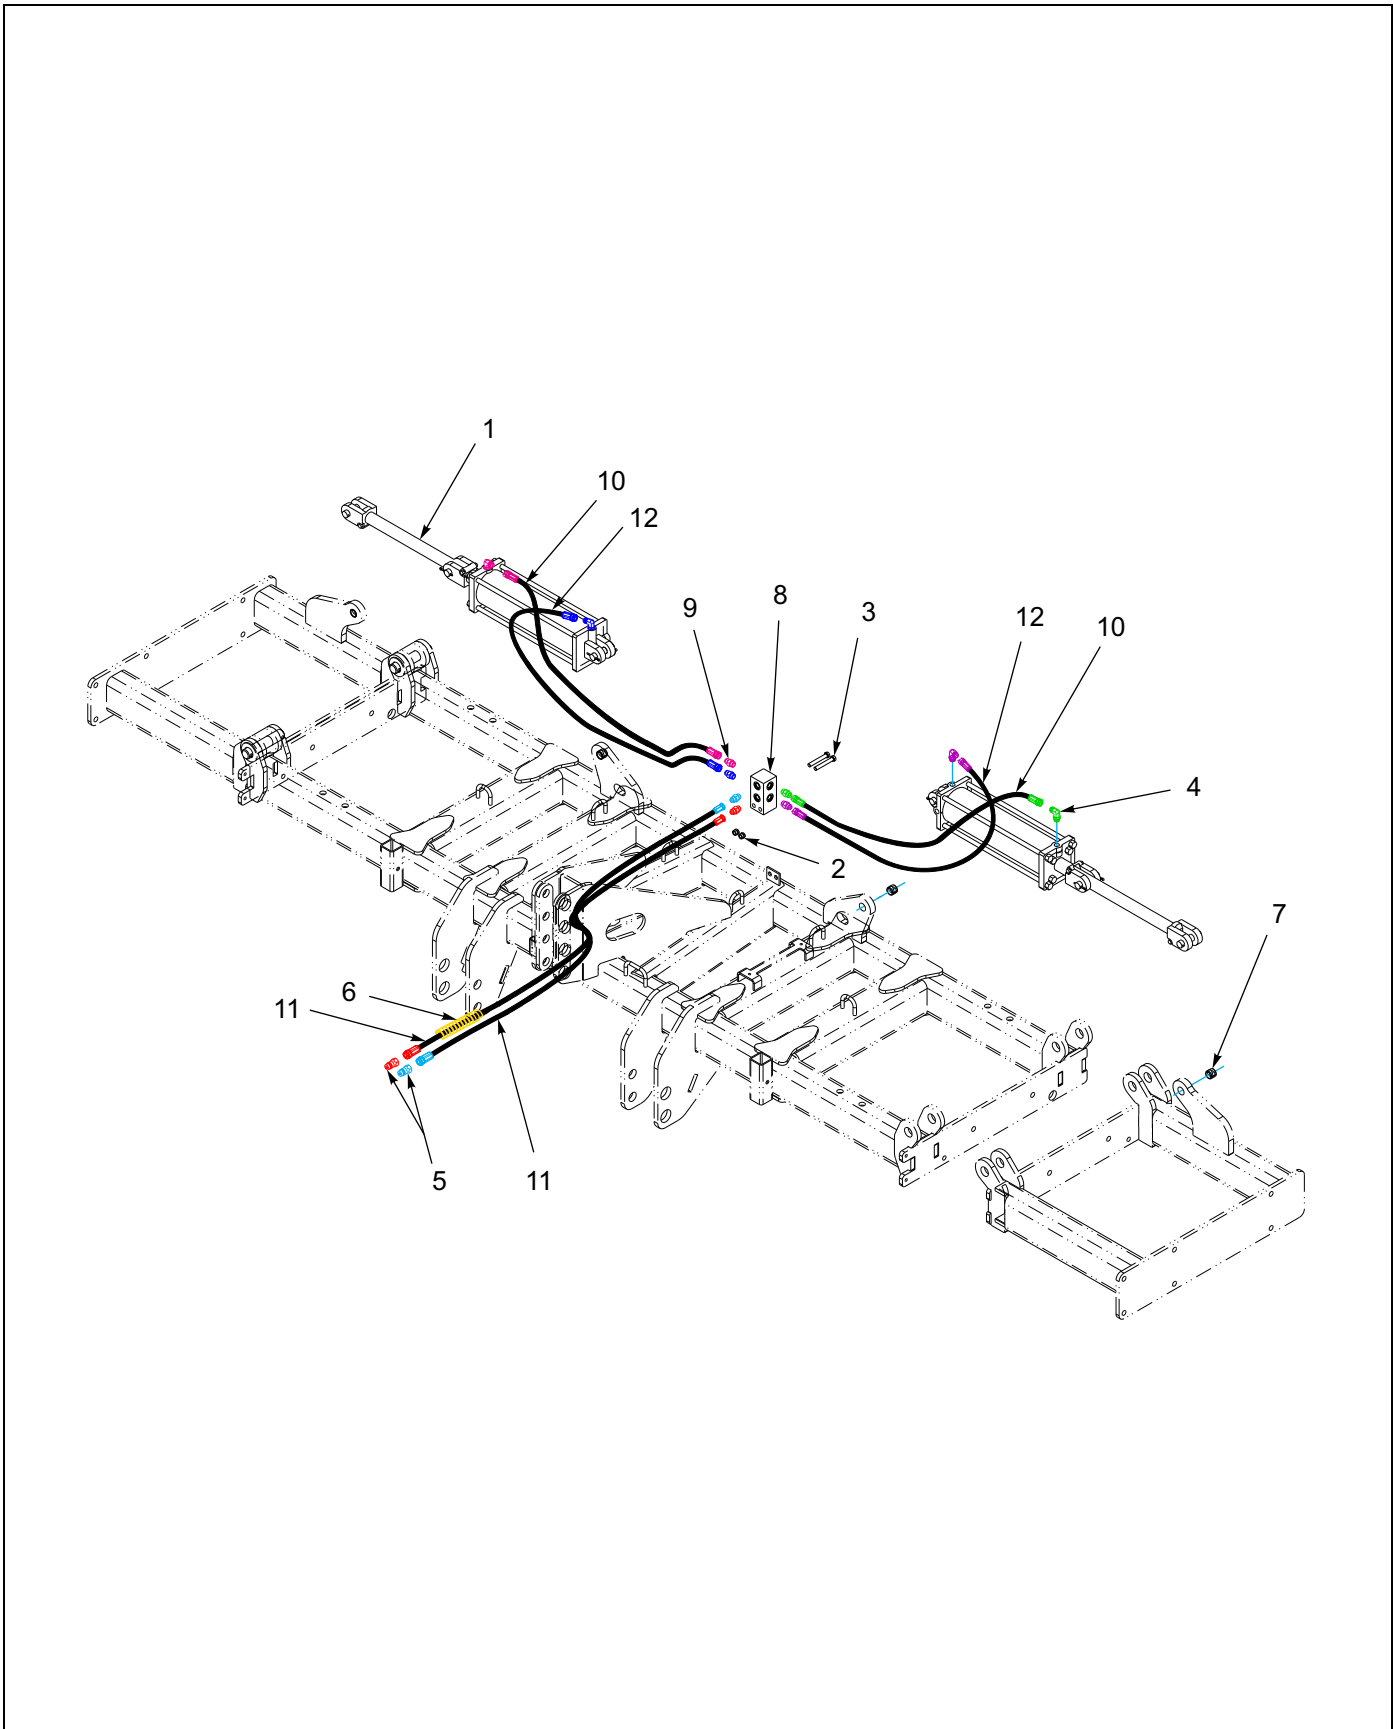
Hydraulic Assembly - Folding 7, 8, & 9 Shank
